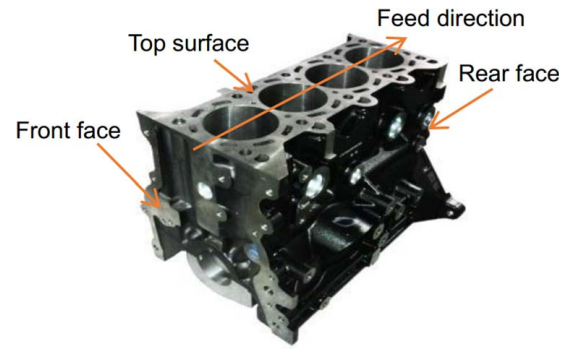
Four-cylinder engine blocks utilized in face milling experiments
